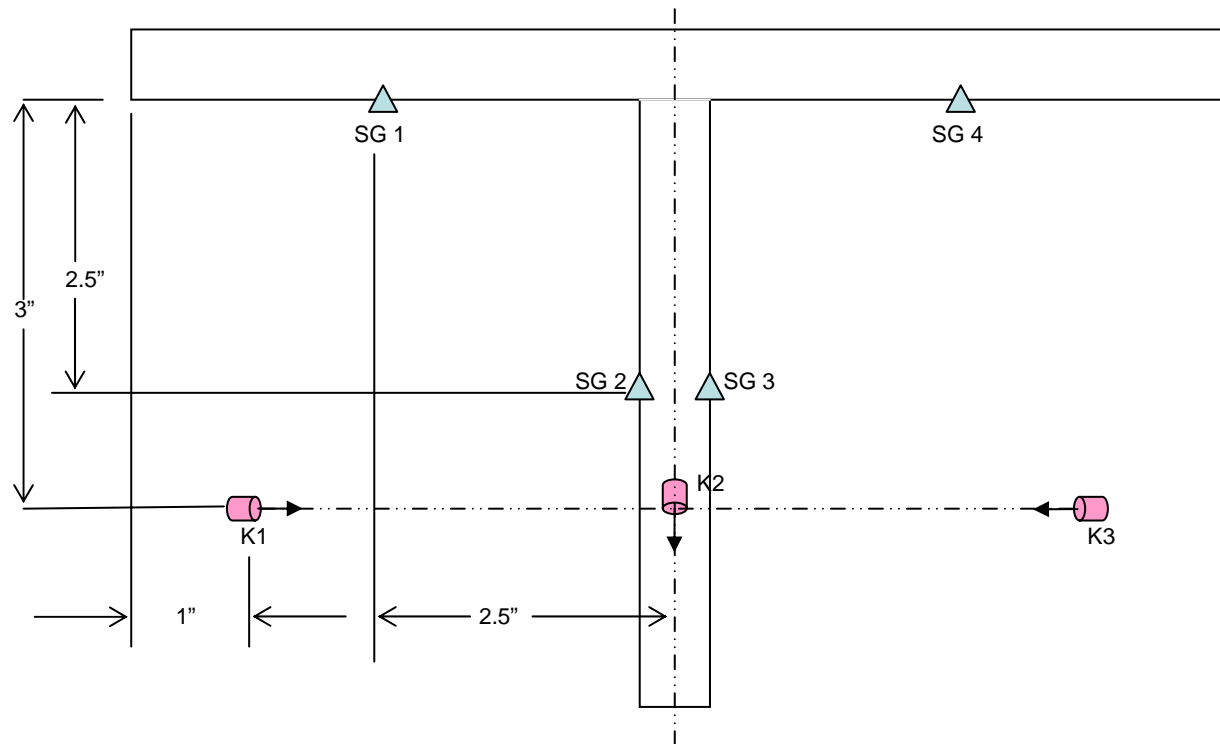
Layout of instrumentation on T-joint (looking down from above)
